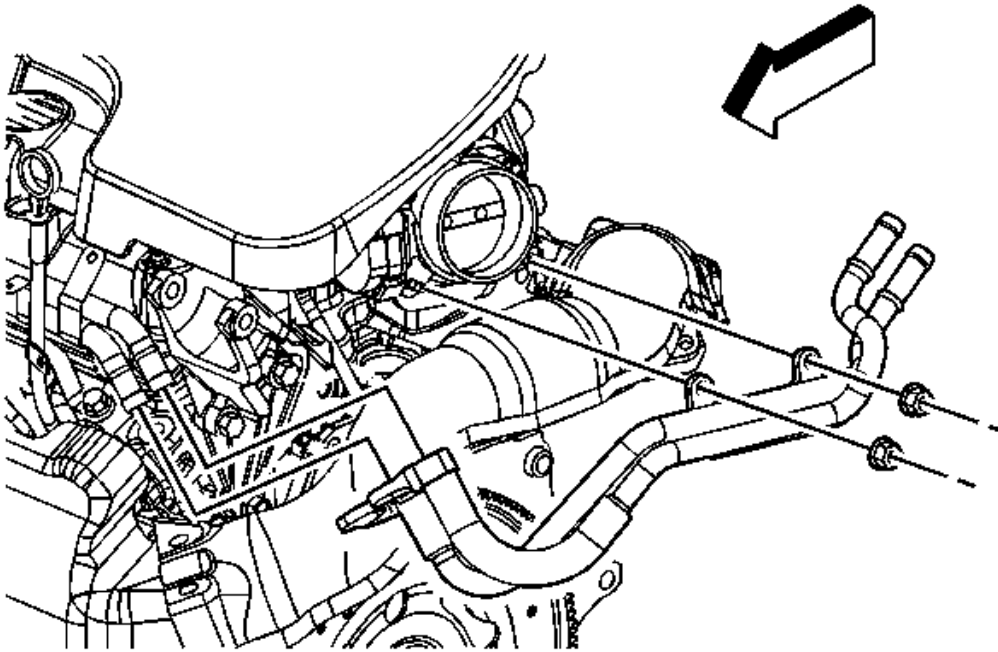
Coolant Inlet And Outlet Hoses/Pipes
